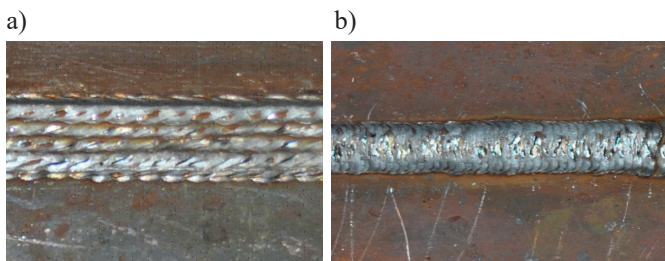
A view of the face of welds made by the 135 method: a) in a horizontal position - PC, b) in a vertical upwards progression - PF
